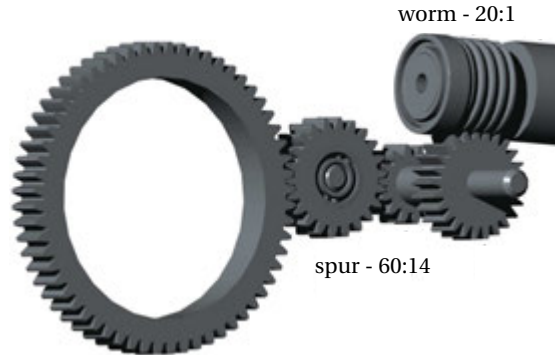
CAD drawing of gearing in bending module - *image from [104]
